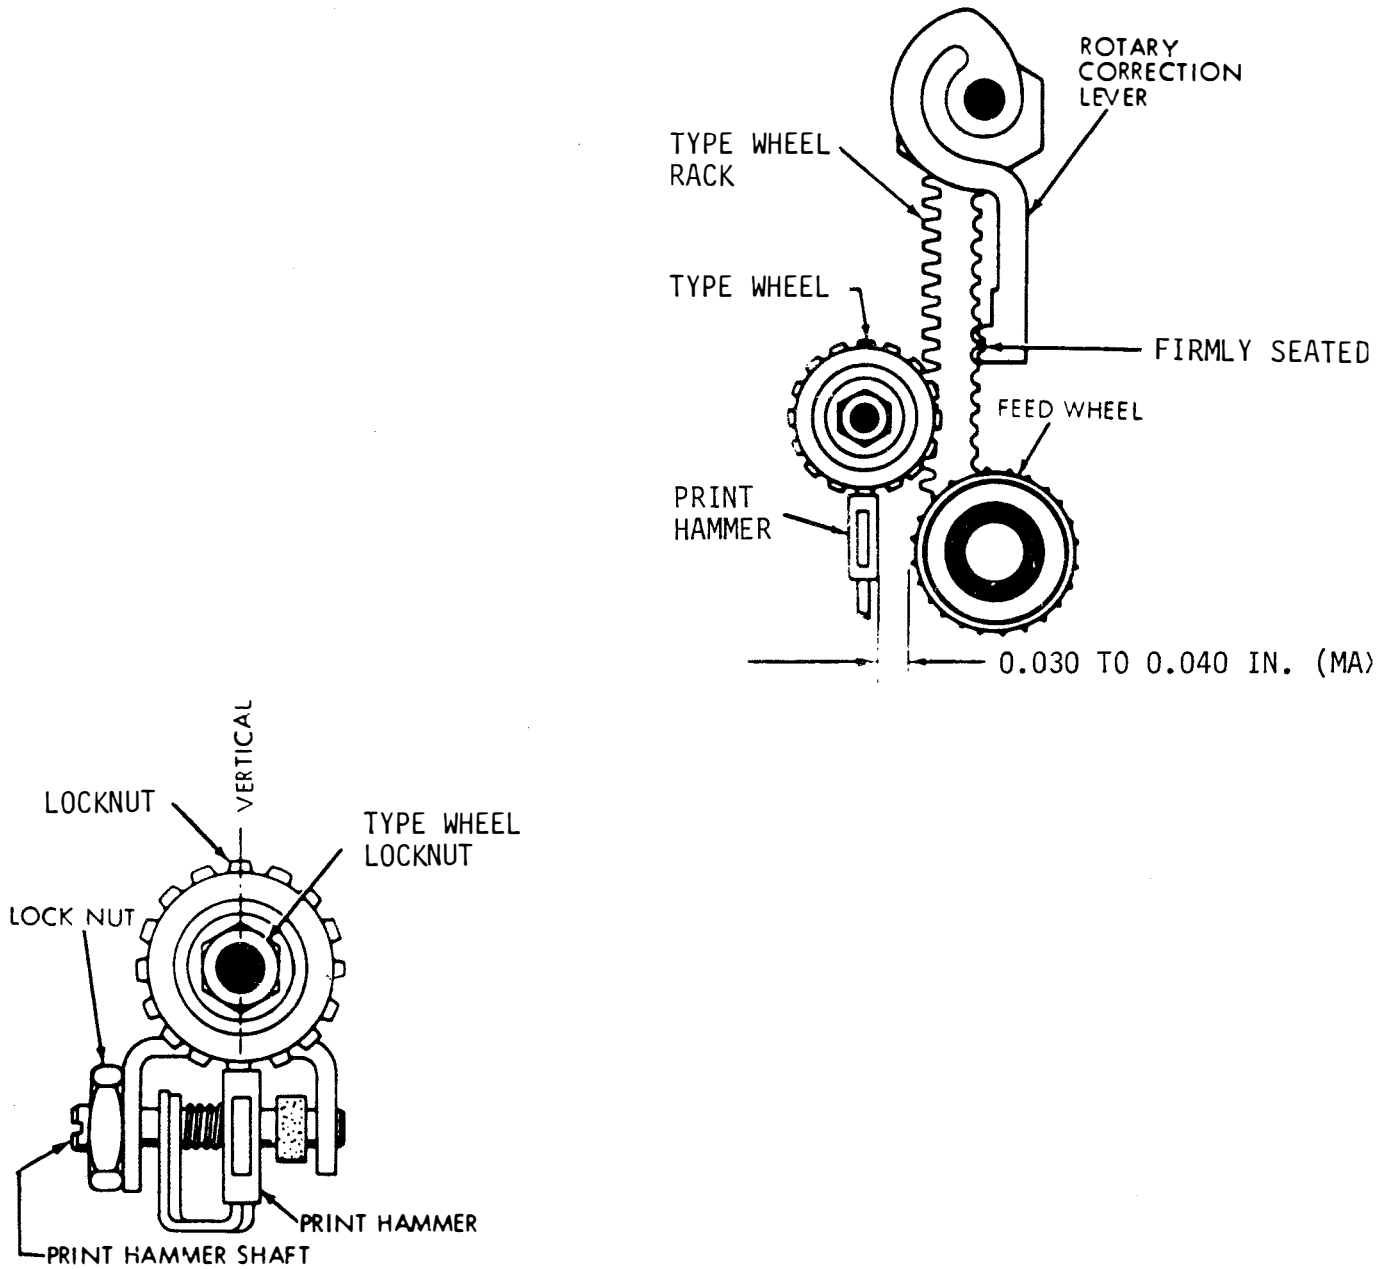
Print Hammer (Preliminary and Final) and Type Wheel Positioning (Fully Perforated Tape), Front View
